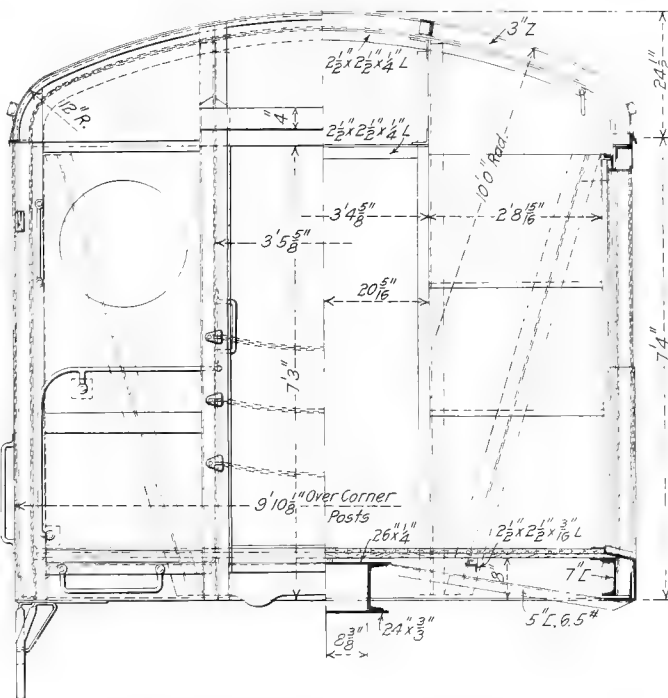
End Construction of Pennsylvania Railroad Steel Frame Car. American Car & Foundry Co.
